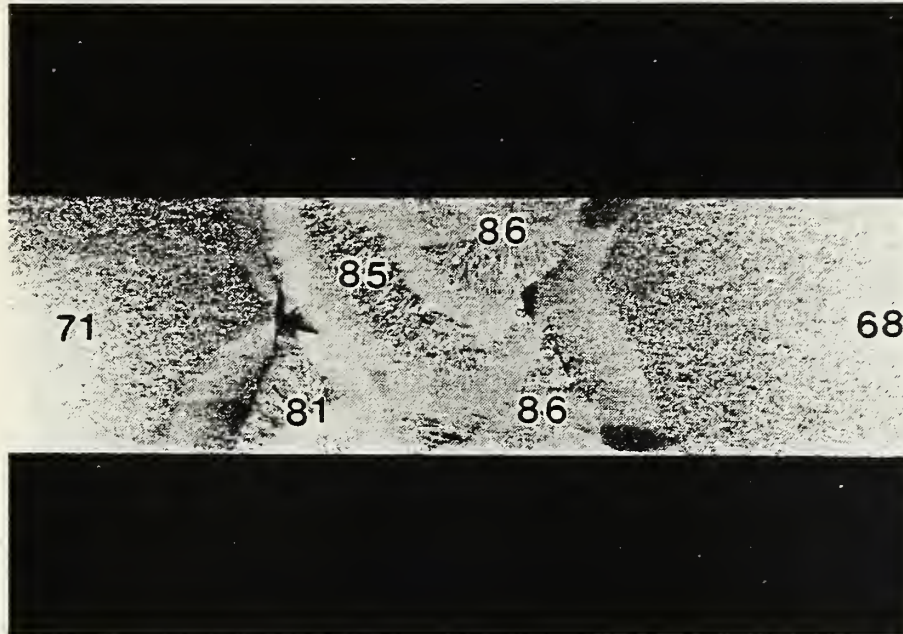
Defects in Horizontal Weld Metal
